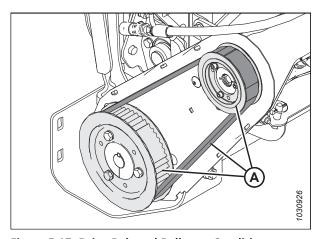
Drive Belt and Pulleys – Conditioner Drive Motor
